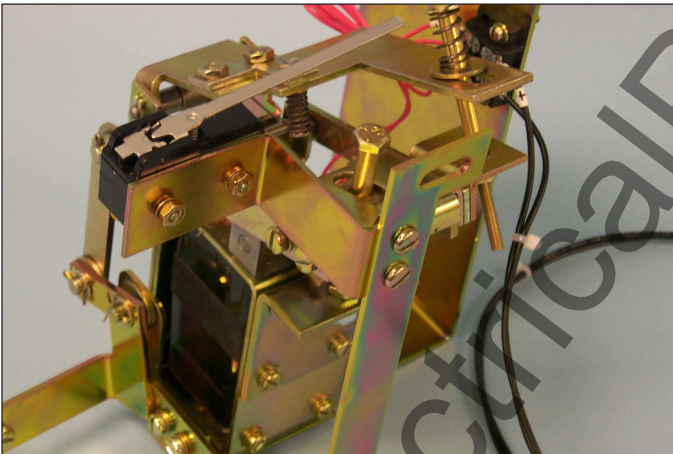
Microswitch Installed on the Auxiliary Switch Mounting Bracket.
